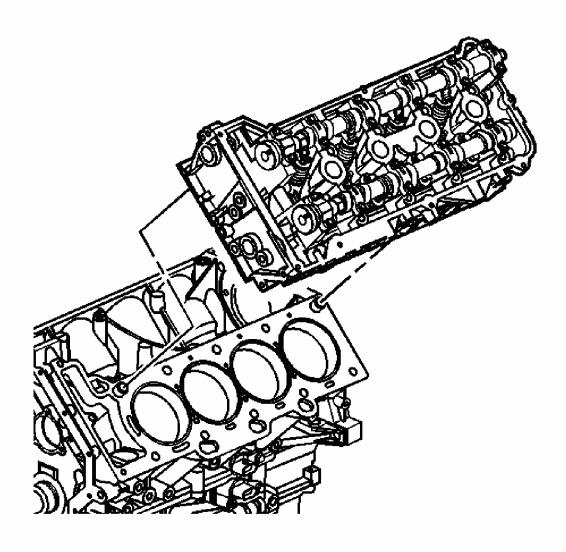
View Of Cylinder Head With Alignment Dowels - Left Courtesy of GENERAL MOTORS CORP.
